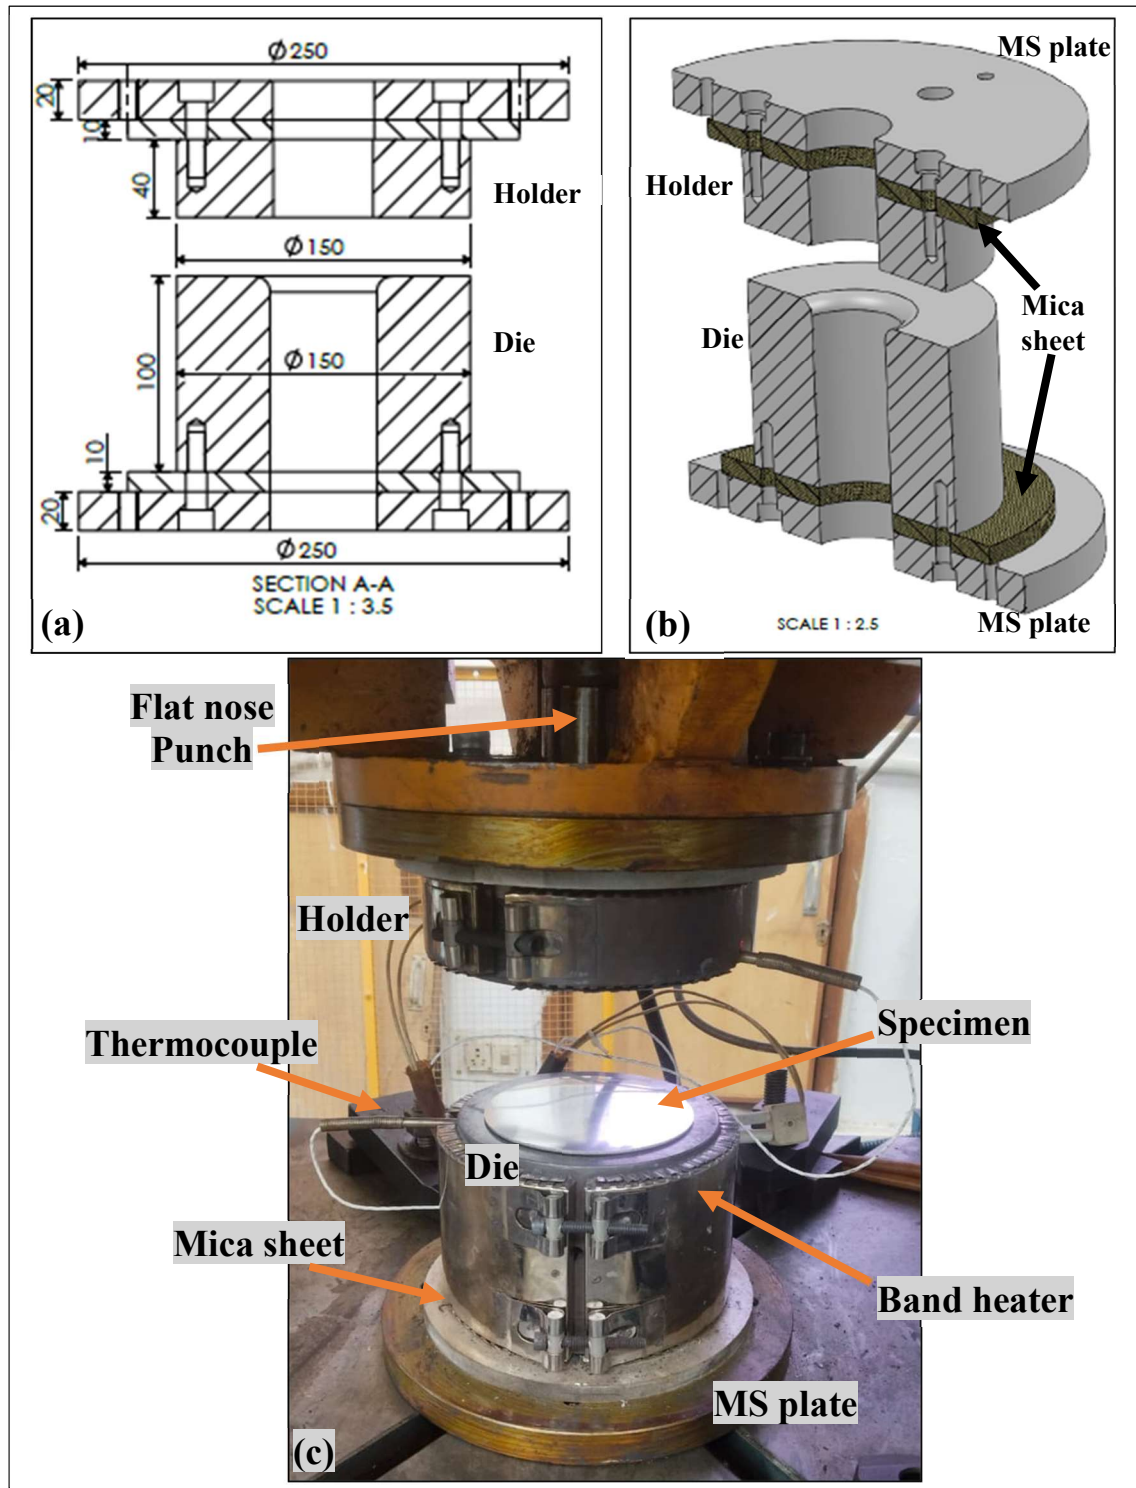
(a) Engineering drawing, (b) solid model, and (c) fabricated assembly setup for deep drawing
